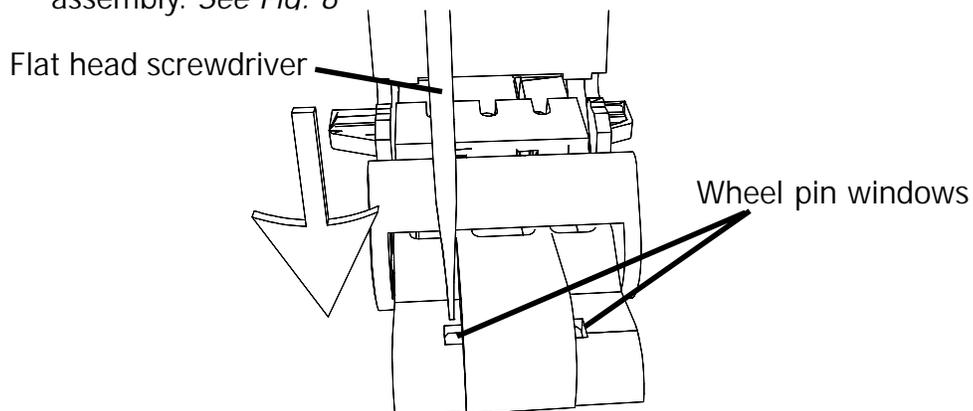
Removing the wheel pin with a flat head screwdriver.
